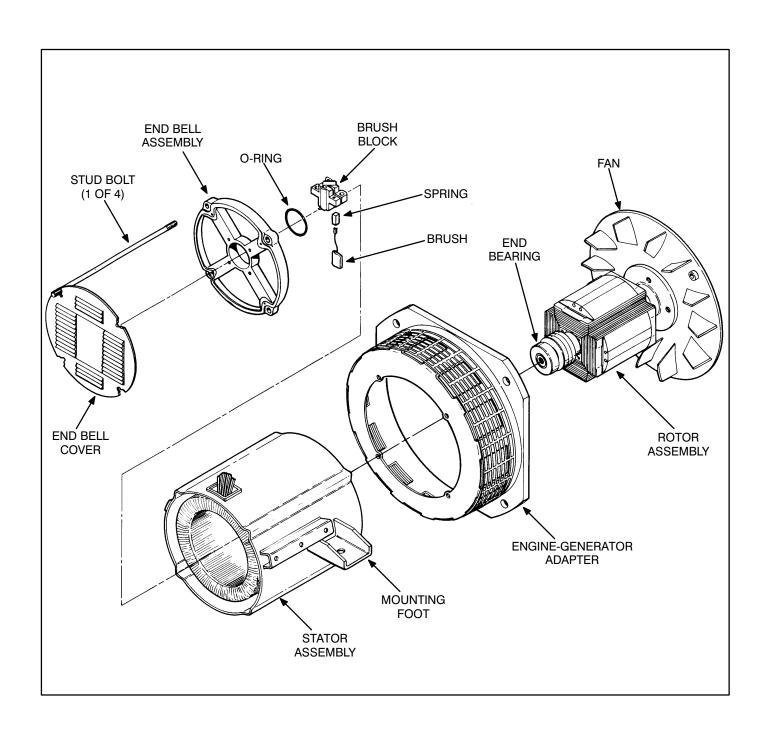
GENERATOR DISASSEMBLY/REASSEMBLY
